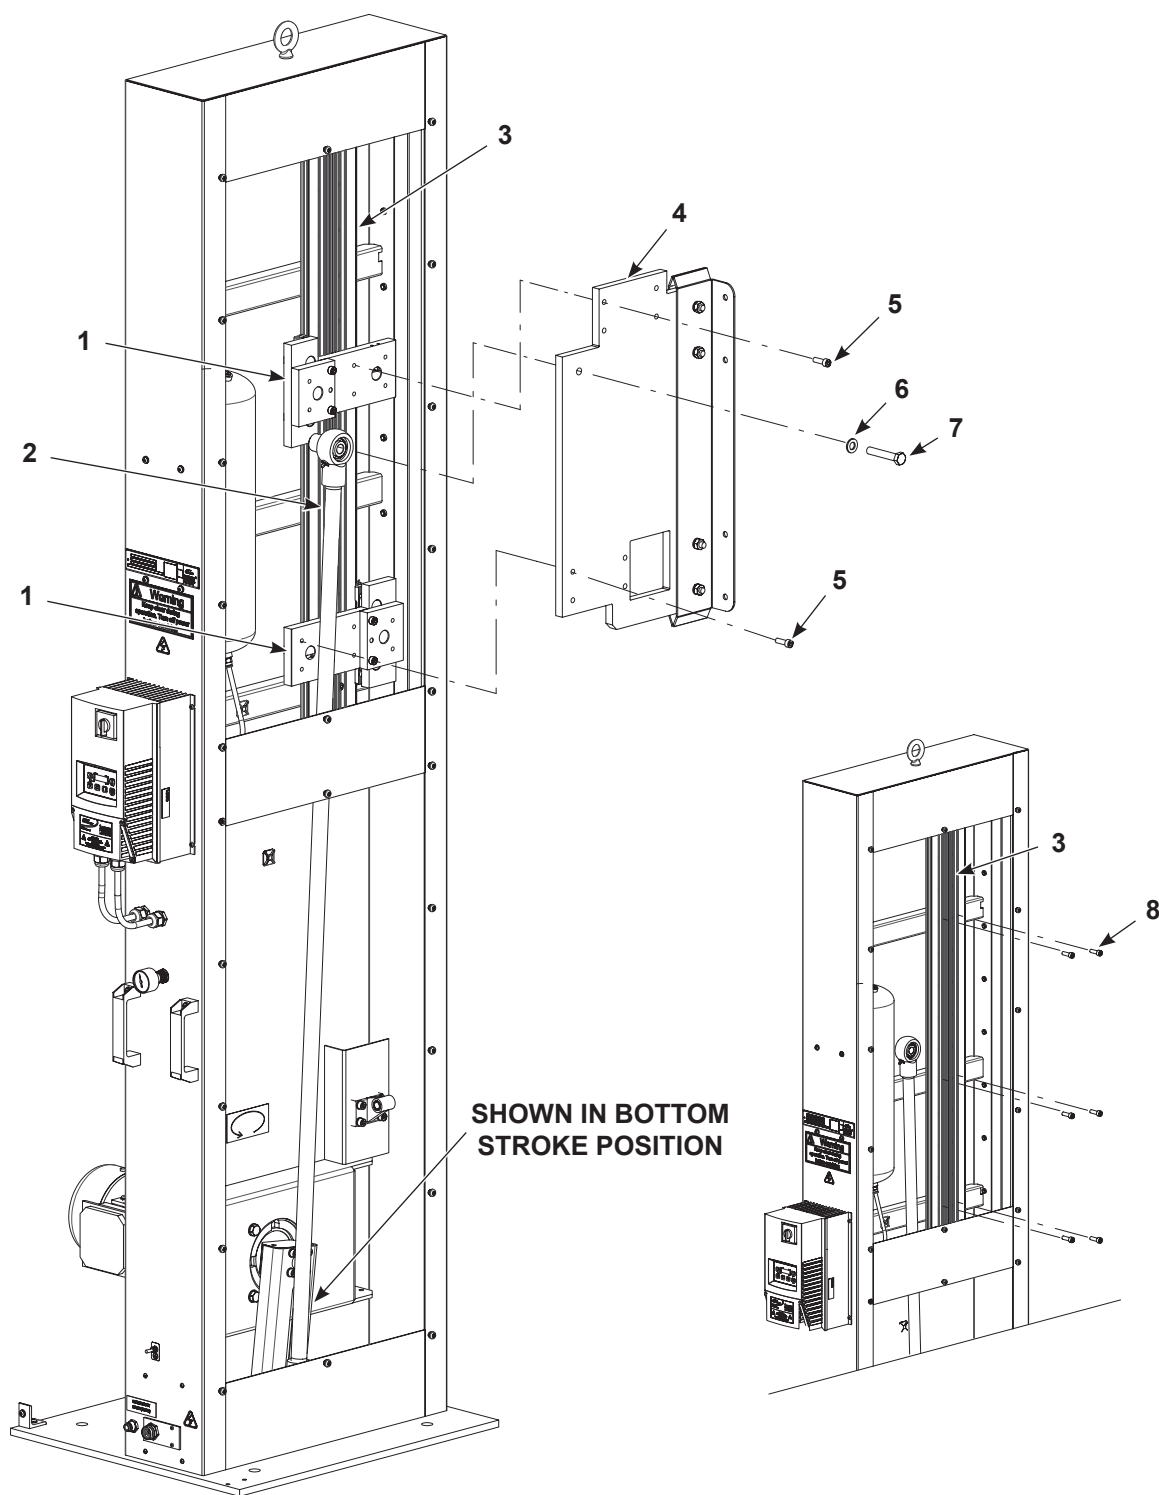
Installing the Carriage and Gun Mounting Plate Assemblies
